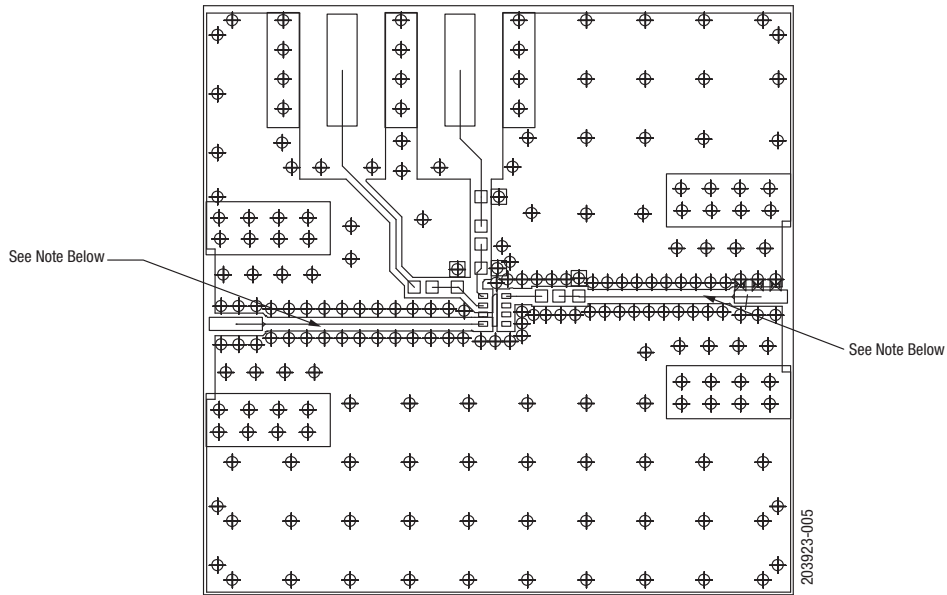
SKY65723-81 Evaluation Board Assembly Diagram
